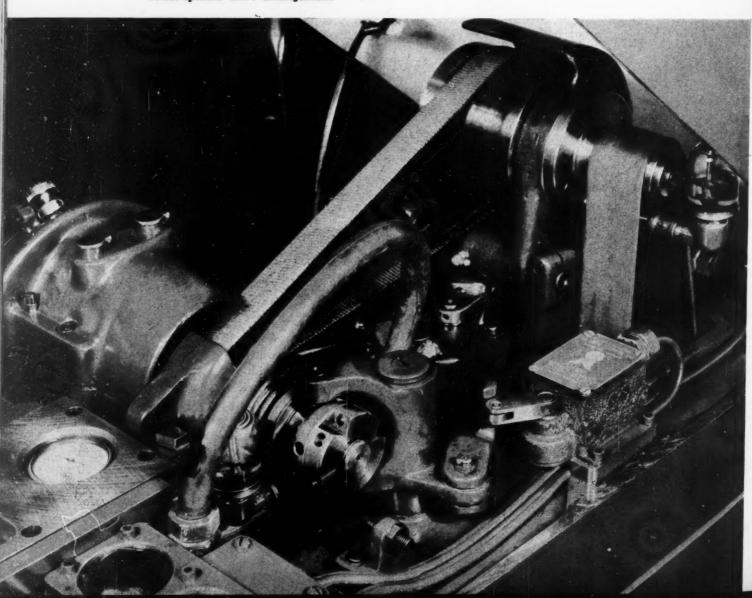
Top view of wheel base with cover raised to show wheel spindle drive arrangement
